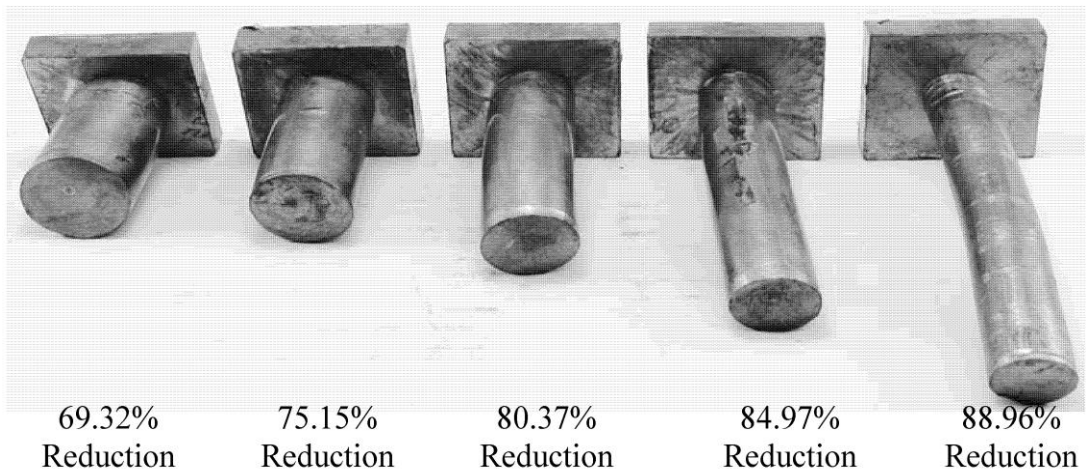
Extruded forward extrusion-forging square head shaped product
